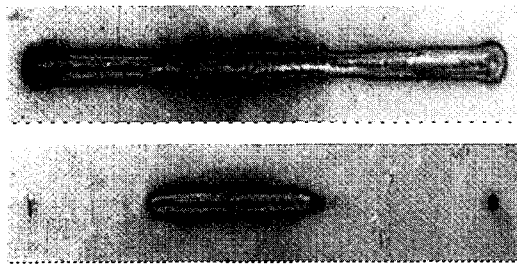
The front surface (above) and back surface (bottom) of the welded plates.
